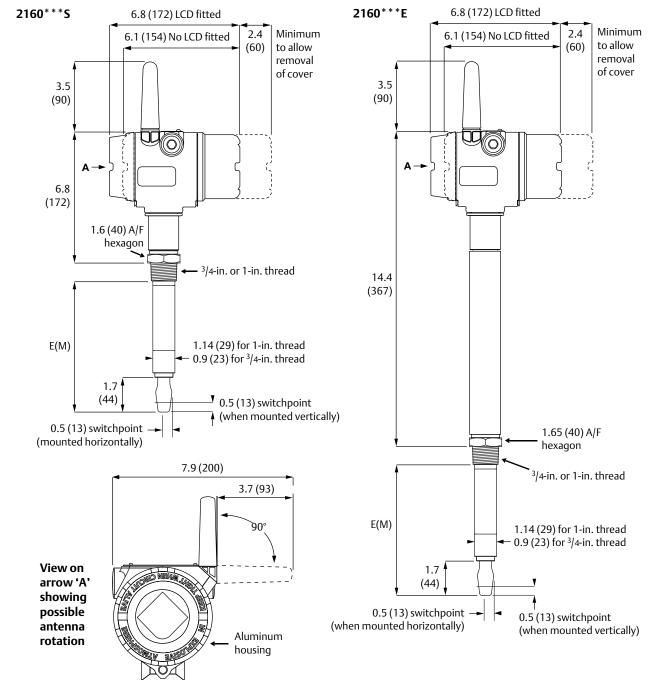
3/4- and 1-in. Threaded Process Connections (Extended Length Fork)
